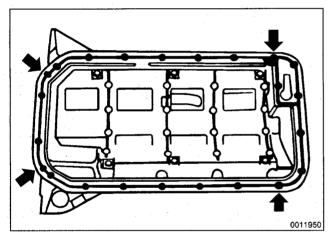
Joint-mating areas at oil pan gasket where sealer should be applied (arrows). Apply a bead 3 mm wide by 2 mm high.
